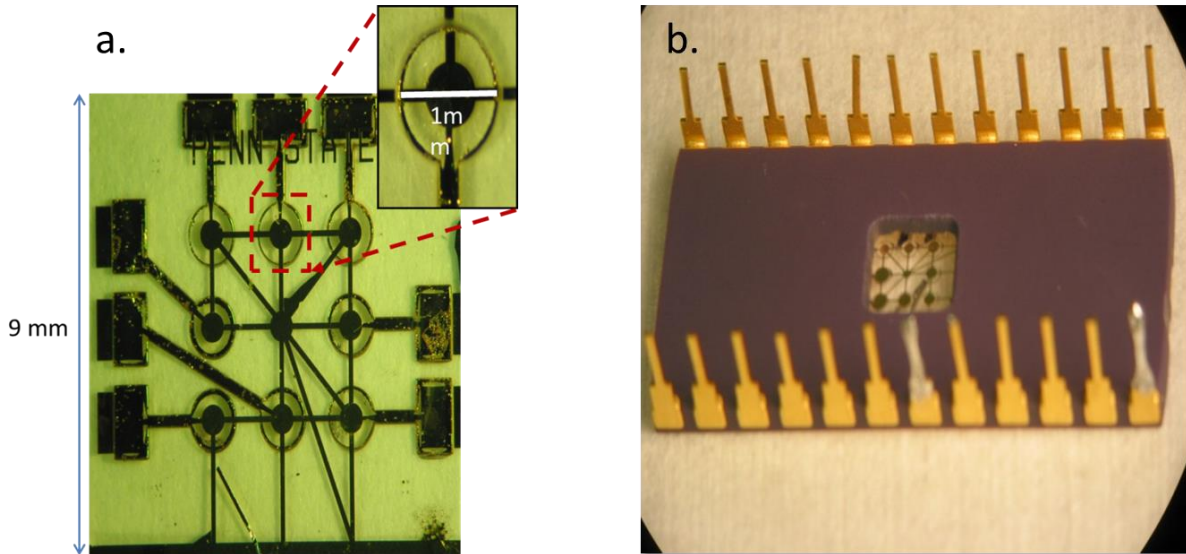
a. A completed 10x10mm quartz substrate with 8 test devices ready for wire bonding to the carrier package. b. A device bonded into a ceramic chip carrier ready for mounting onto the circuit board carrier. (Penn State University)
